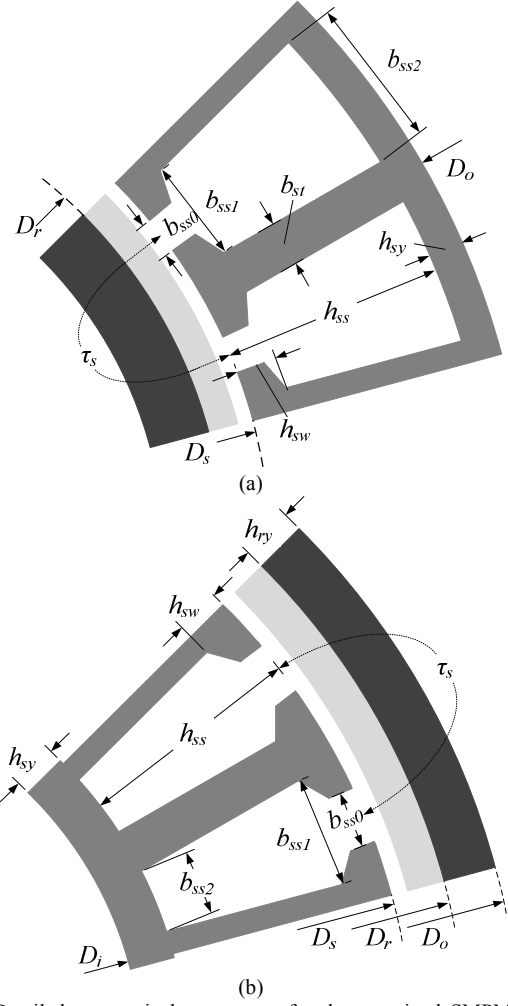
Detailed geometrical parameters for the examined SMPM motor designs, a) inner rotor configuration, b) outer rotor configuration.
